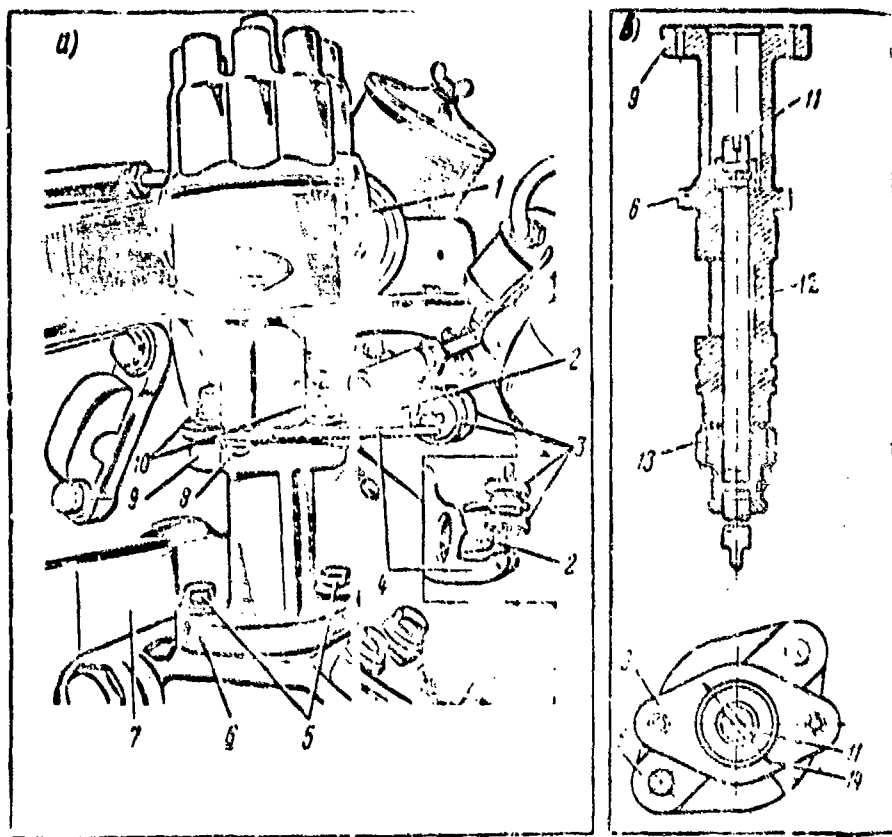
Installation of the distributor on a ZIL-130 engine:
